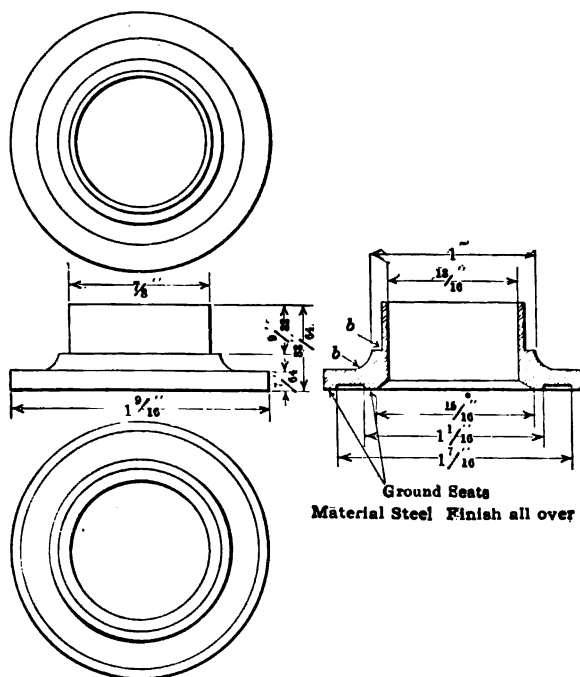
Busch-Sulzer Diesel air compressor valve.
